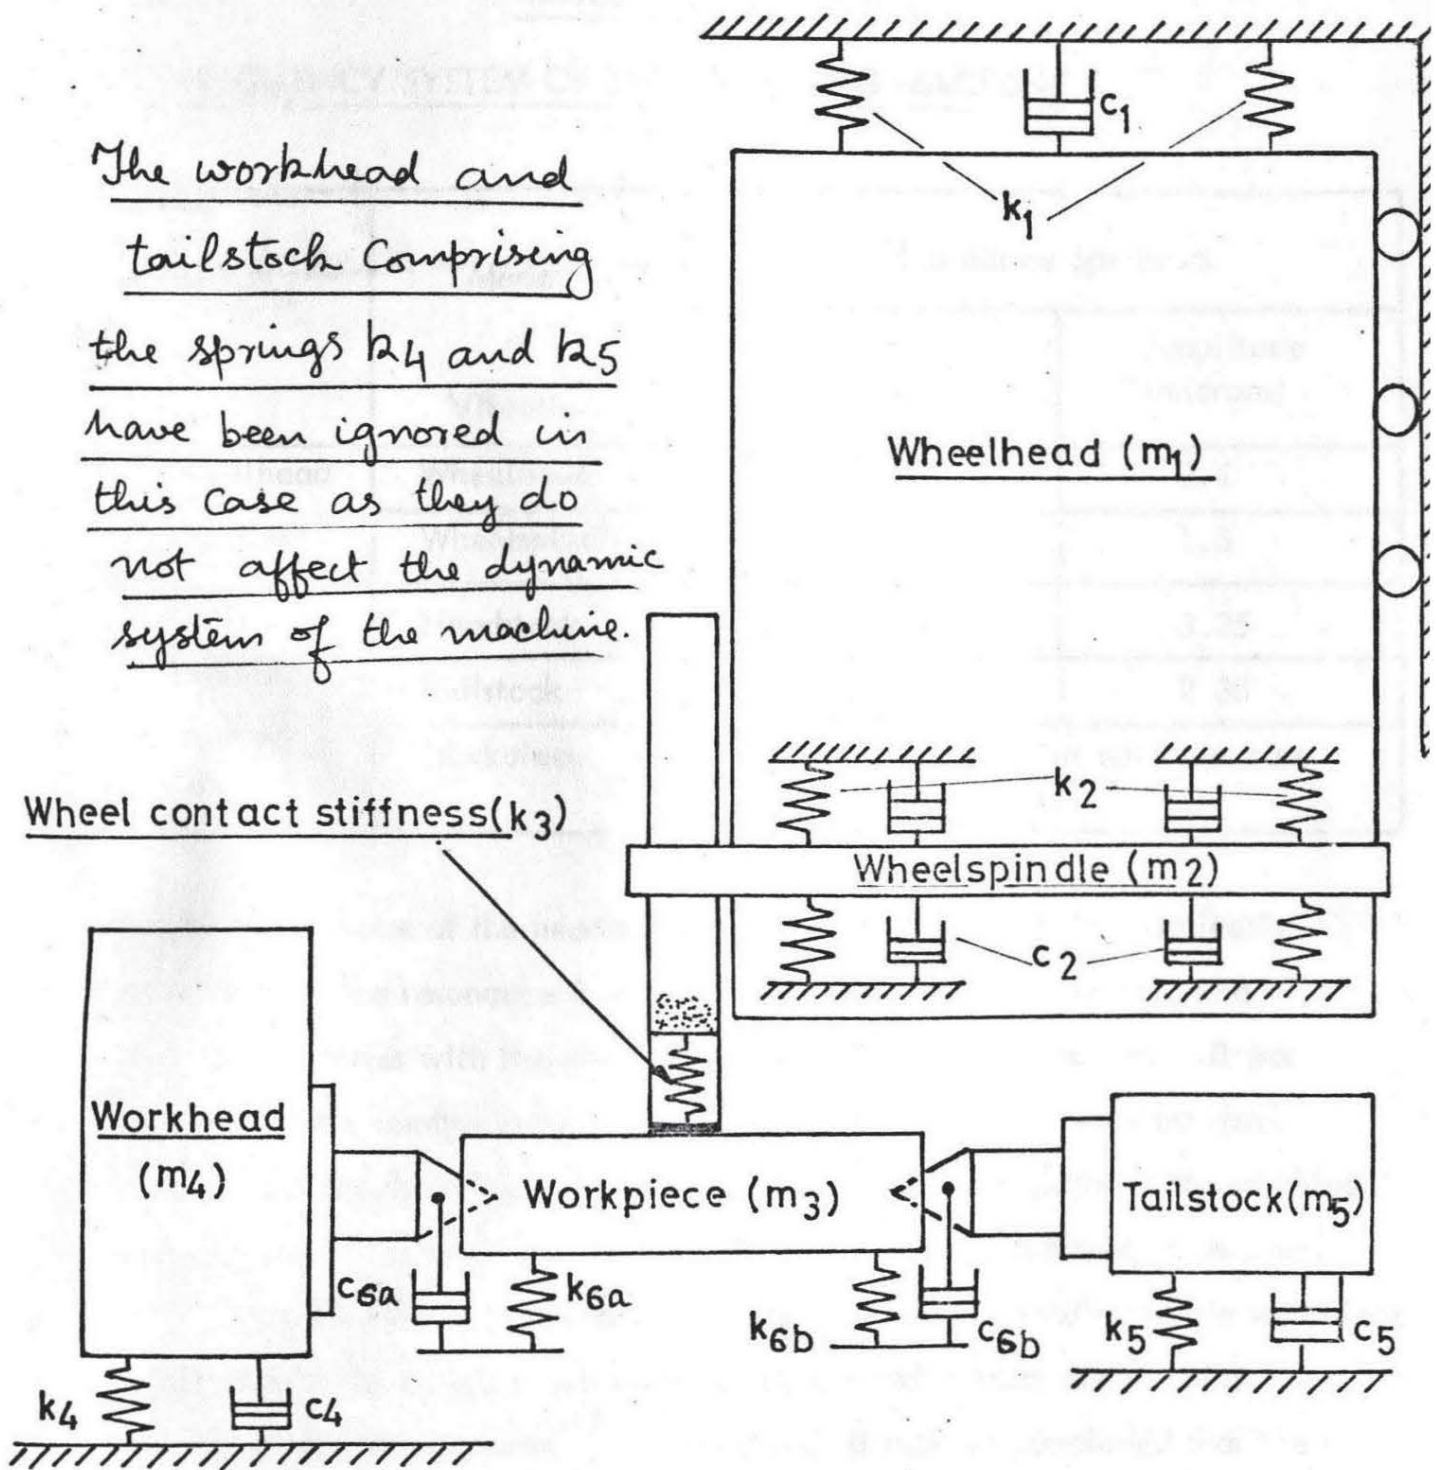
DYNAMICAL REPRESENTATION OF THE GRINDING WHEEL WORKPIECE MACHINE TOOL SYSTEM.
